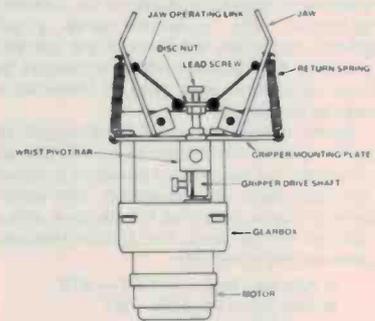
Side view of the gripper, showing how the lead screw, driven by the motor, operates the gripper jaws.
